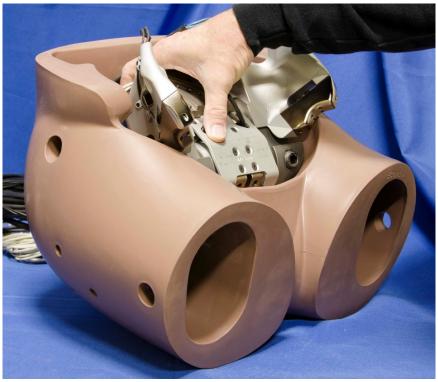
Insert mechanical pelvis assembly into molded pelvis skin
